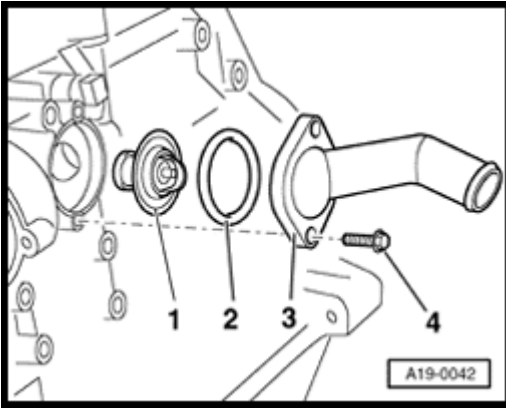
Identifying Elbow Connection, Bolts, O-Ring & Thermostat
